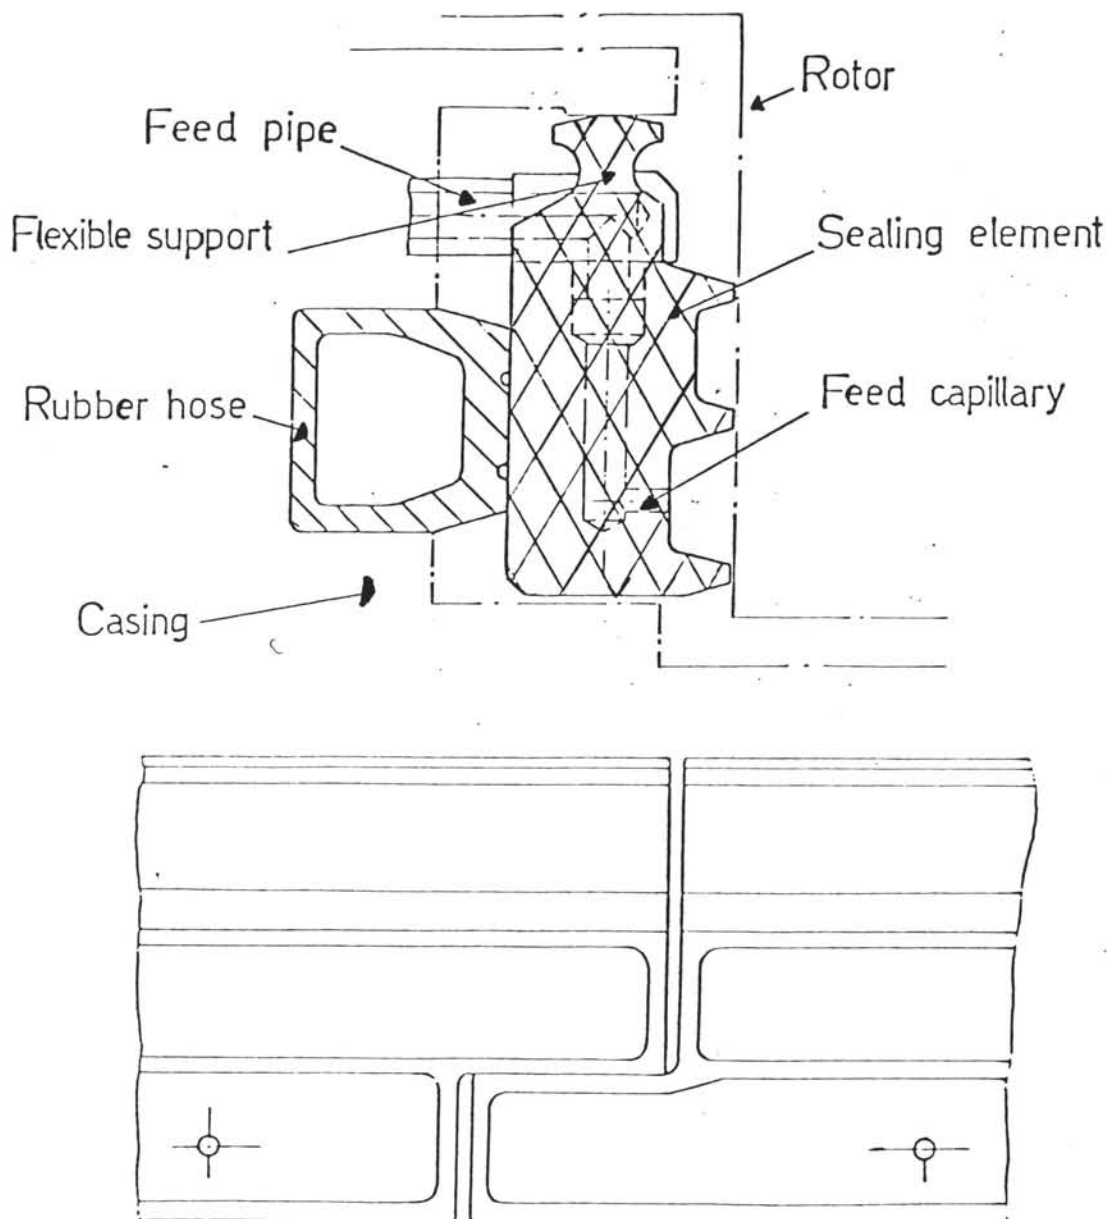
Arrangement of hydrostatic sealing elements between the stationary turbine casing and the rotating outer rim. The elements are pressed hydraulically against the rotating sealing surface of the rotor.
